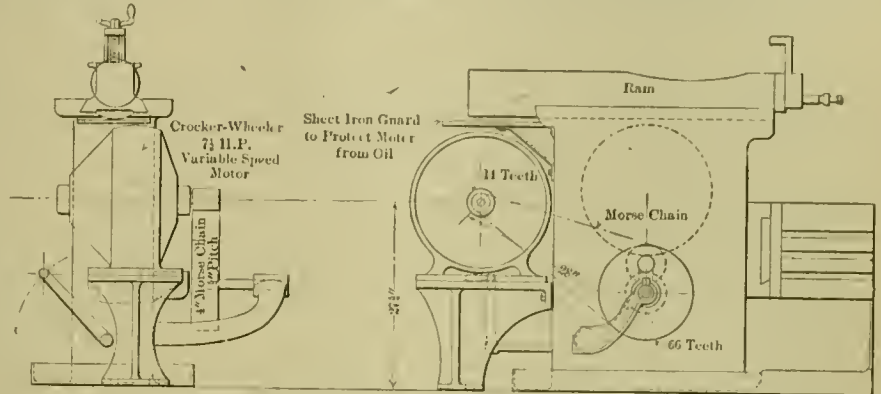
THE ARRANGEMENT OF MOTOR DRIVING USED UPON THE 24-IN. GOULD & EBERHARDT CRANK SHAPER.—7½ H.P. CROCKER-WHEELER MOTOR.
